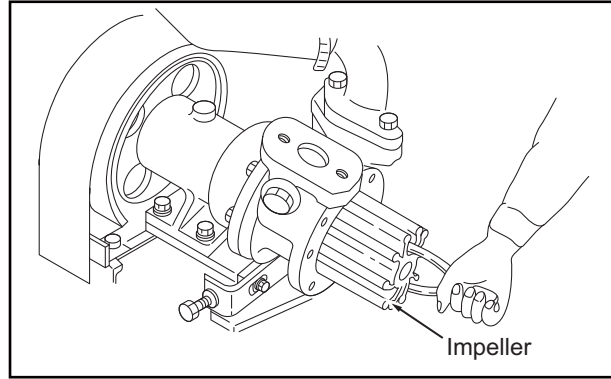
Seawater Pump Impeller - Inspect
